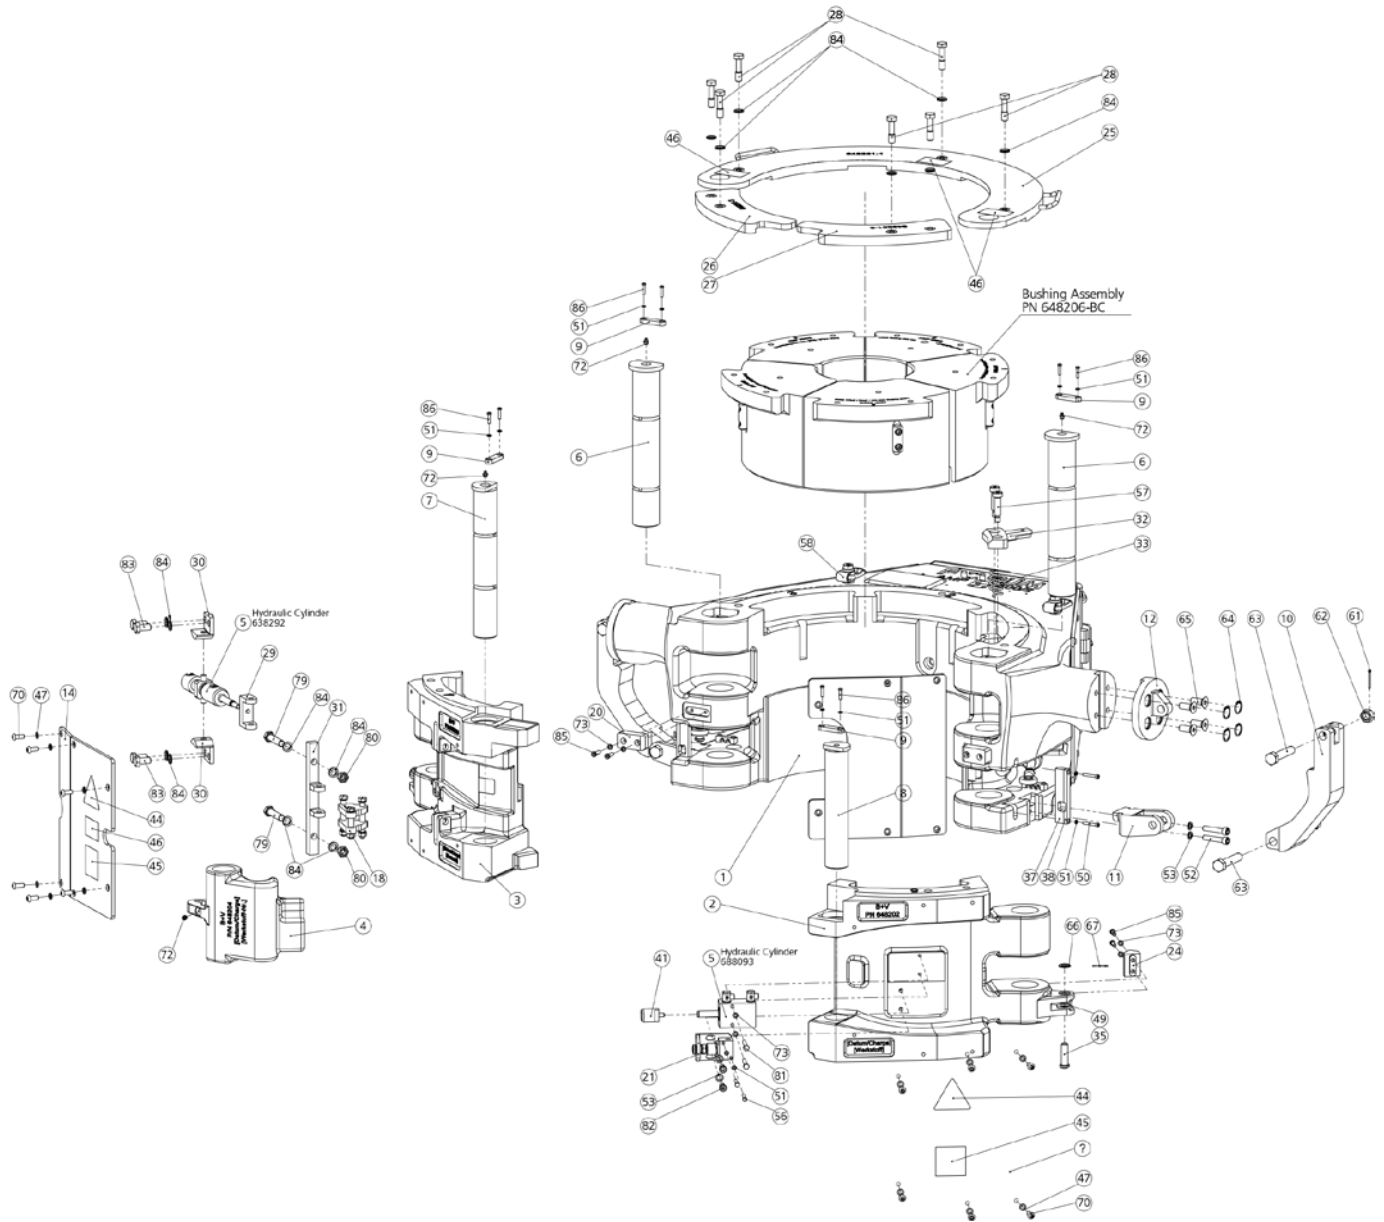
648200-Y AMP®-500/2 Drawing I
